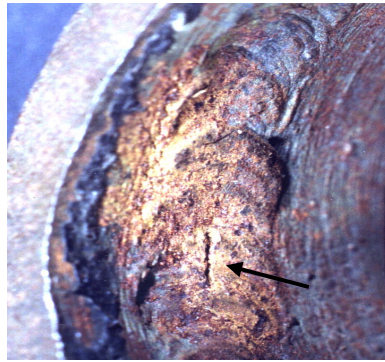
Circumferential fracture in weld of pipe(Ø38, thick-3mm)
